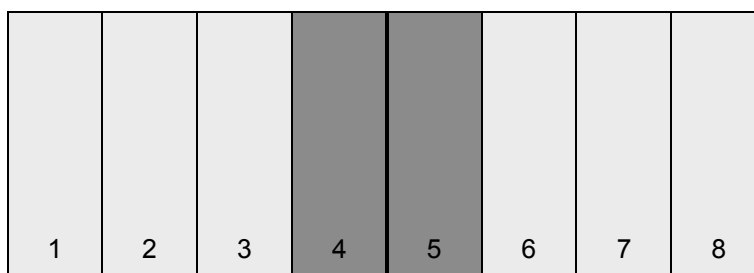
Zones of the welded specimen for Eddy current testing. Zones 4 and 5 represent the weld metal
